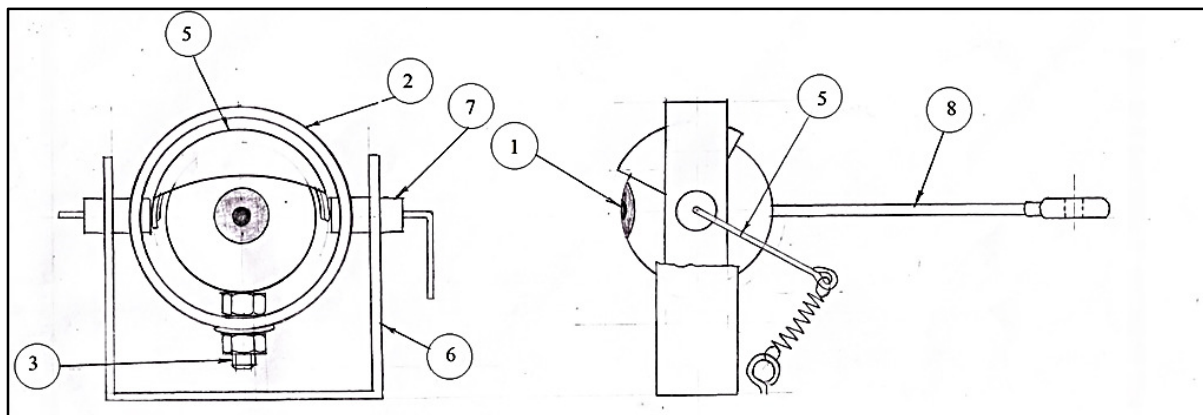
Assembly Drawing of Eyelid mechanism with part numbers
